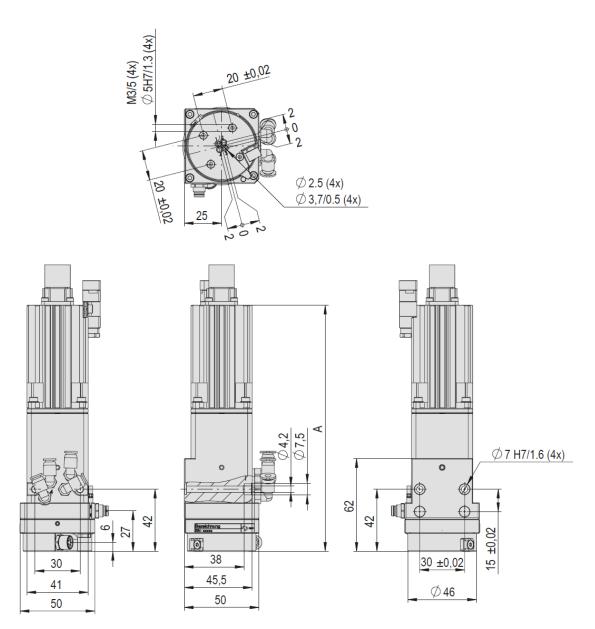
Dimensional drawing rotational axis RA-40-4F-5F
